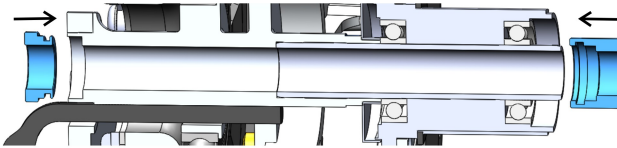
Left side thru-axle end-caps fit inside axle, while the right side slides over the axle .
